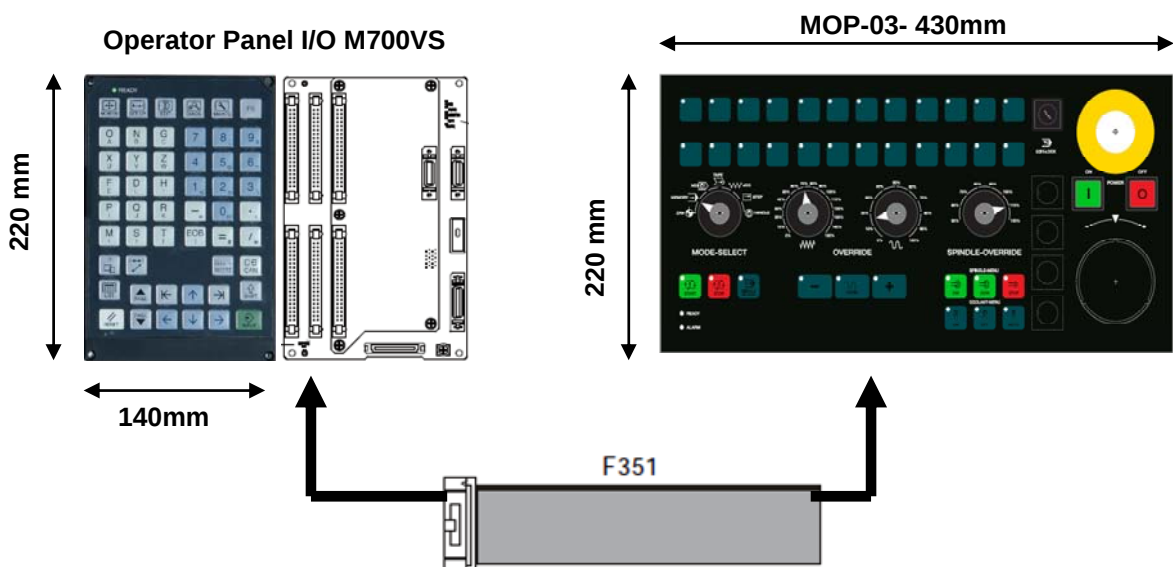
MOP-03- 430 mm connected to Operator Panel I/O of M700 VS CNC
